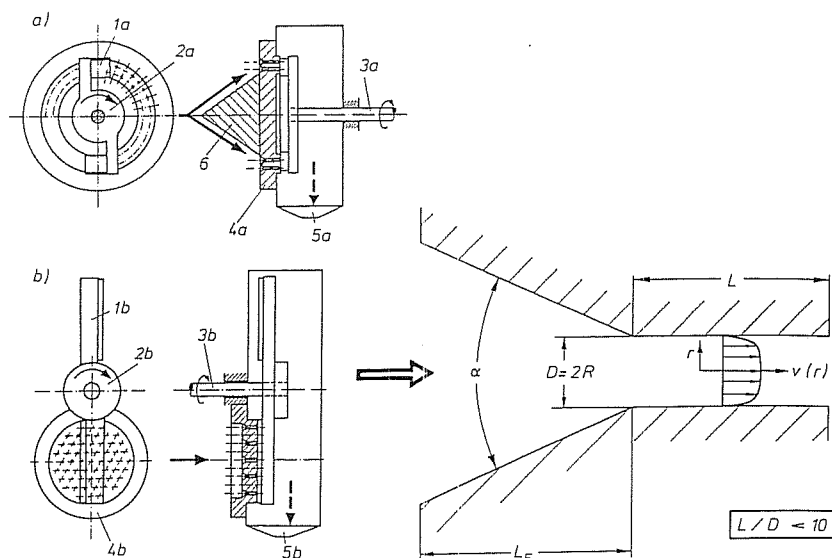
Hot pelletizers [1], a) Pelletizer with a knife shaft in the center b) Pelletizer with an excentric knife shaft, 1a and 1b – Knife, 2a and 2b – Knife holder, 3a and 3b – Knife shaft, 4a and 4b – Pelletizer die, 5a and 5b – Pellet collector housing, 6 – Torpedo
